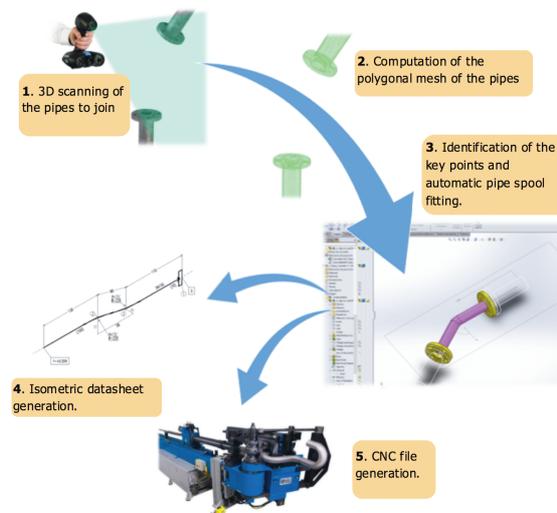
Schematic representation of the five steps involved in the spool fitting tool.
